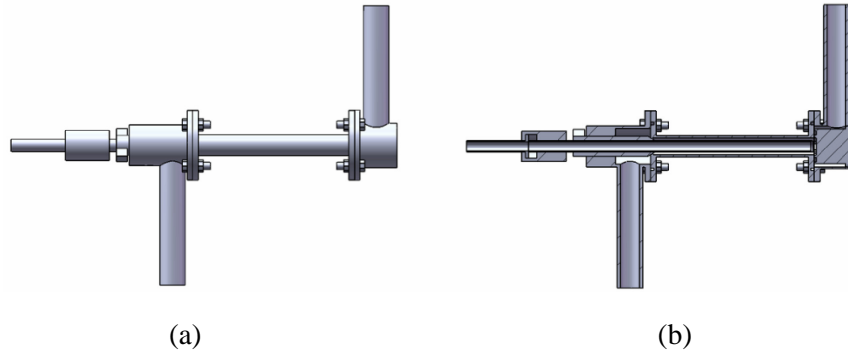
Uni-flow type vortex tube: (a) Assembly view and (b) Sectional view.
